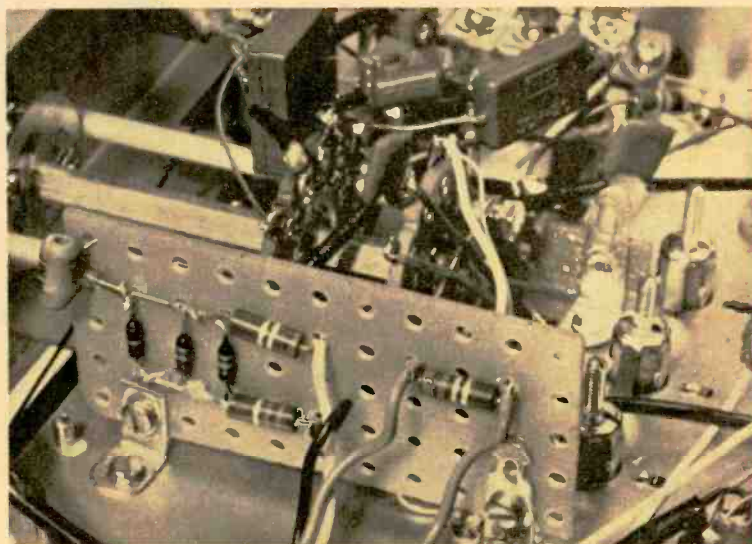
Close-up of board mounted in HA-226. C1 is located in upper left corner of board. Its lead goes through board and directly to wiper lug on oscillator wafers of bandswitch, which is 1 in. to the right of C1 in photograph.
